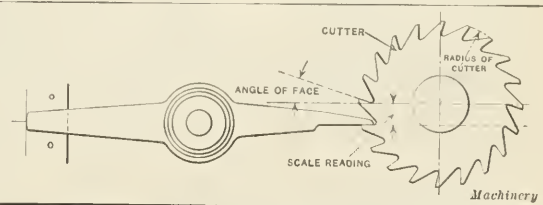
Diagram illustrating how Indicating Lever for Under-cut Teeth is set off Center on Fixture shown in Fig. 47
